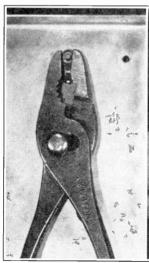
A. One method of using ordinary all-purpose pliers to prevent the soldering nut and lug from turning as screw is tightened.
